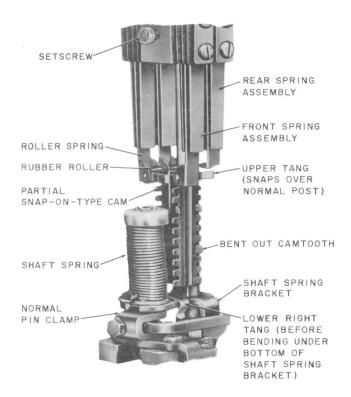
Normal Post Spring Assembly Having Rubber Rollers Operated by Partial Snap-On-Type Cam
